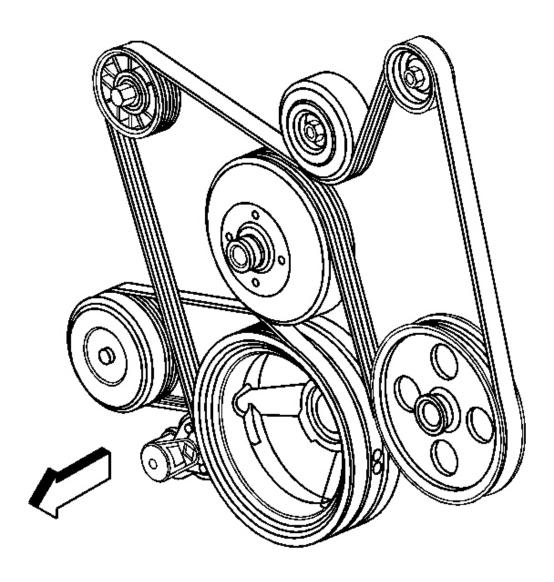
View Of Accessory Drive Belt & Pulley Courtesy of GENERAL MOTORS CORP.
